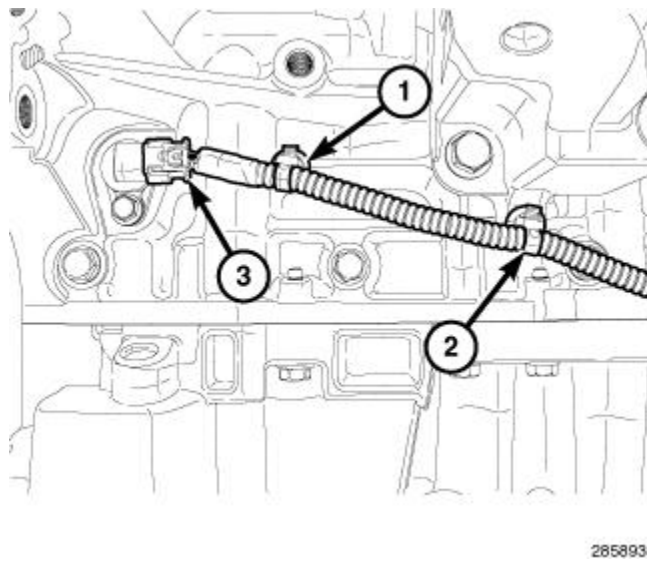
Main Wire Harness Retainers & CKP Sensor
